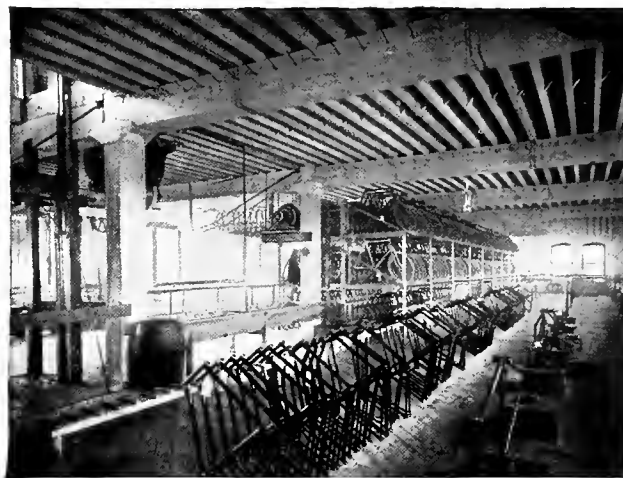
PART OF ASSEMBLING ROOM, SHOWING MOTOR FOR ELEVATOR
